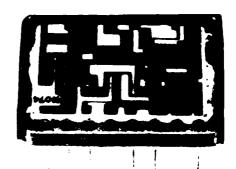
Single-layer thick-film hybrid in 24-pin platform package.
